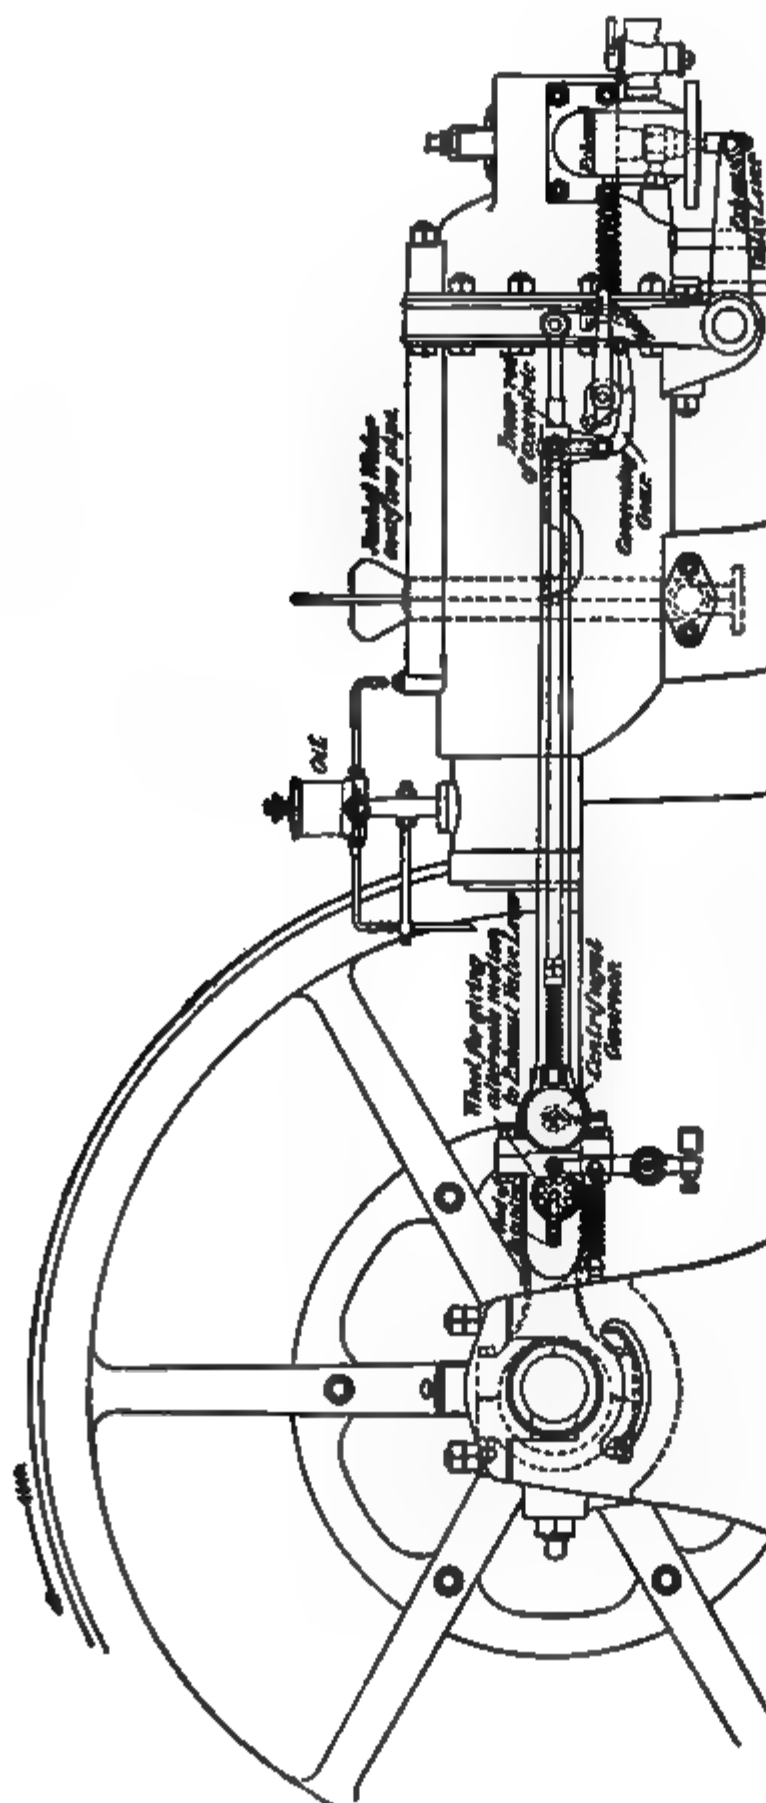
Koerting Horizontal Gas Engine - Elevation. 1898.
